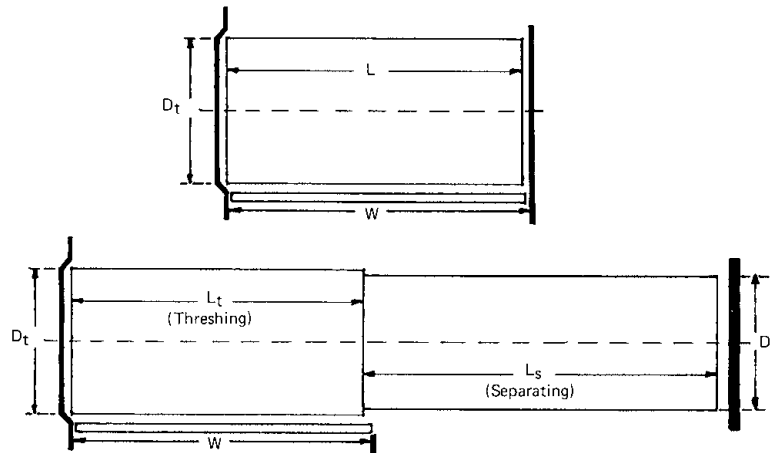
22. Cylinder, rotor and concave dimensions; (ASABE, 2006)
